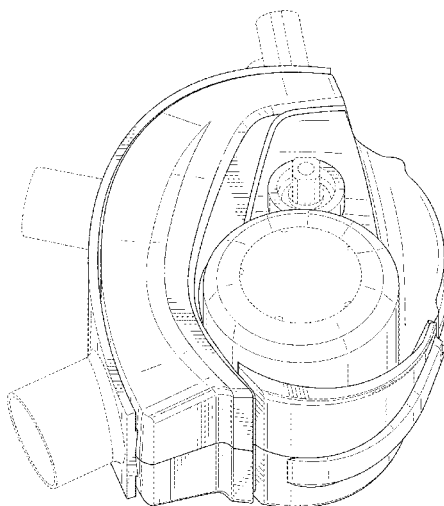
is a right side elevational view showing the design for the bicycle drive unit and frame portion of FIG. 1;
